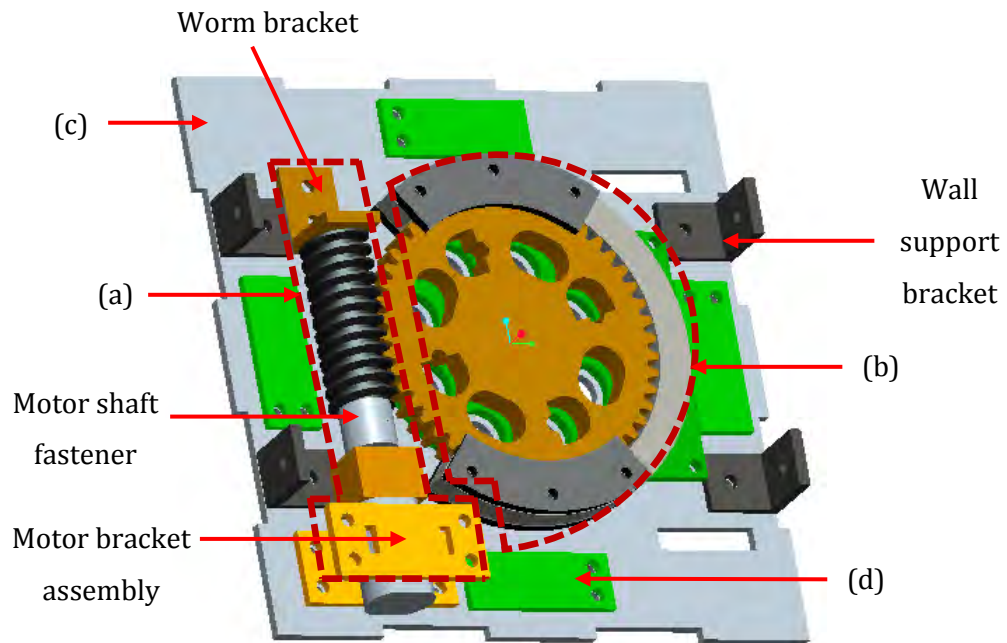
A CAD model of the inner structure of the final connector design showing (a) A motor & worm assembly consisting of a miniature geared DC motor, a worm and support brackets, (b) A gear wheel assembly consisting of a specially designed gear and its support brackets, (c) The connector's face plate and wall support brackets, (d) The connector's PCBs shown in green.
